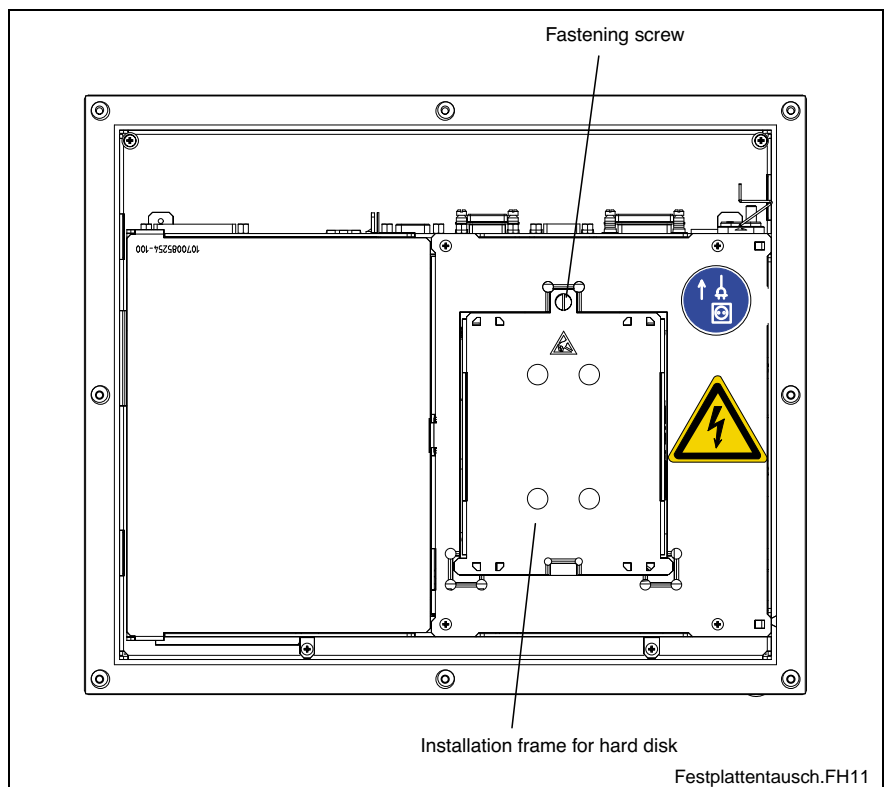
Position of the hard disk's installation frame and the fastening screw
